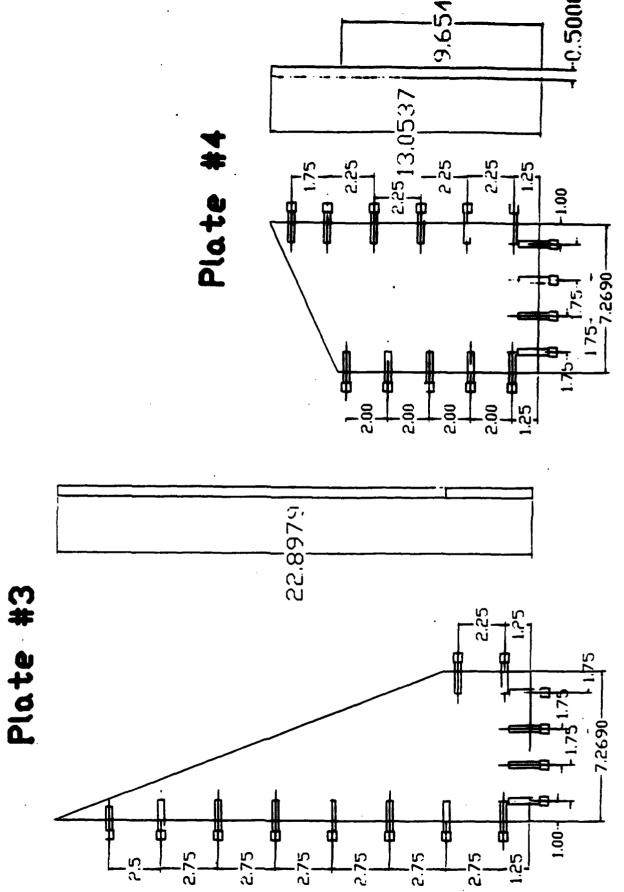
Lateral Load Supporting Plates (#3 & #4)
